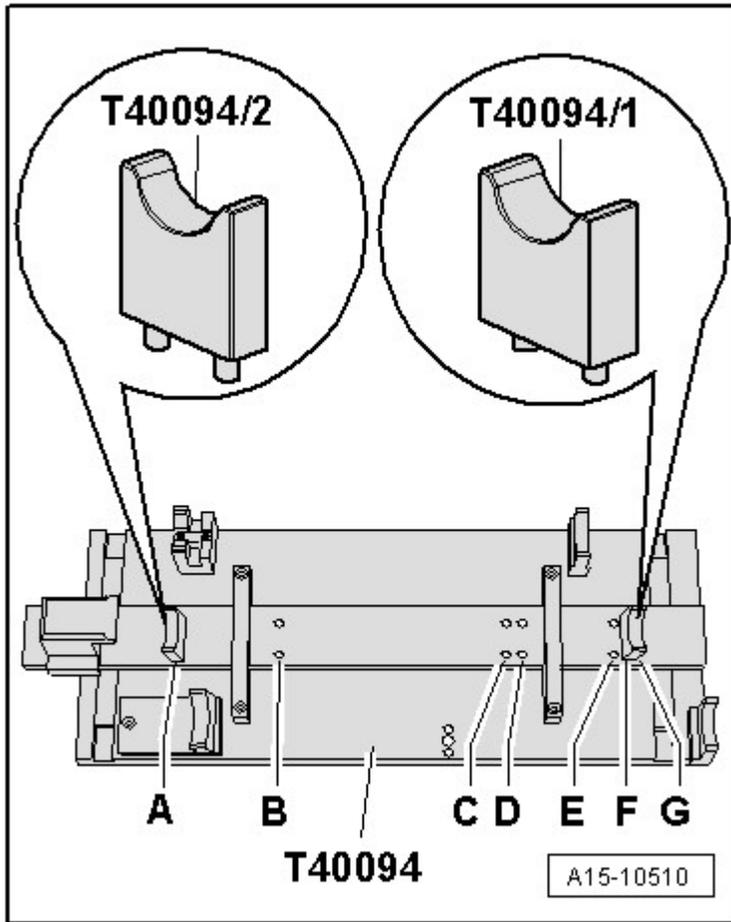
Identifying Mounting Brackets On Base Plate Position
